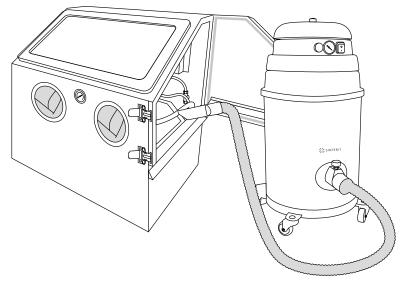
Remowing used Abrasive material with ATEX Vacuum Cleaner.
